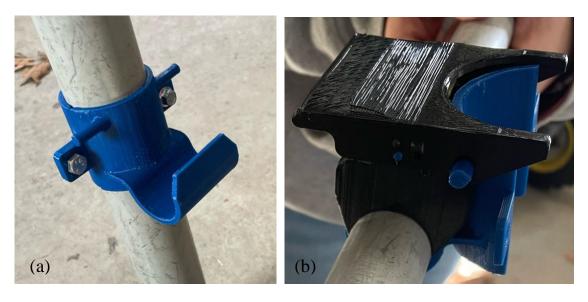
3D printed hook and gate latch attachment mechanism.
